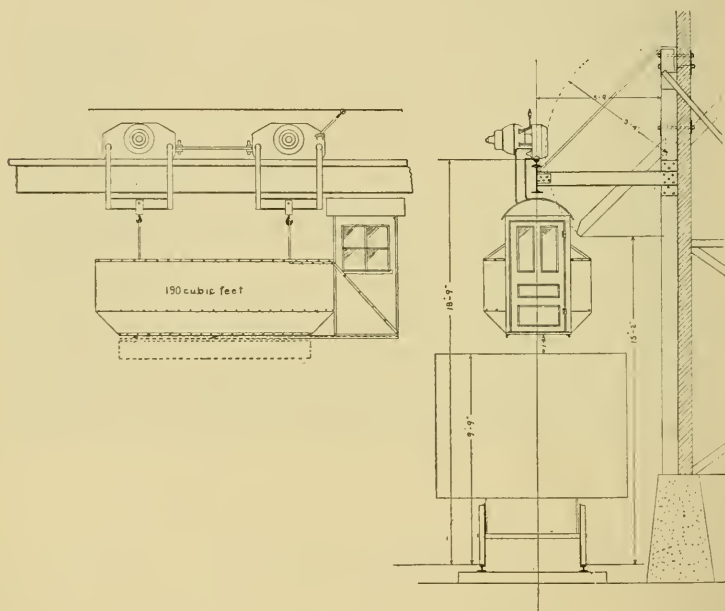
Plan and elevation of another form of double telpher with four-ton coal bucket, bottom dumping, cab for telpherman. The side elevation shows method of attachment to side of building and loading chute.
